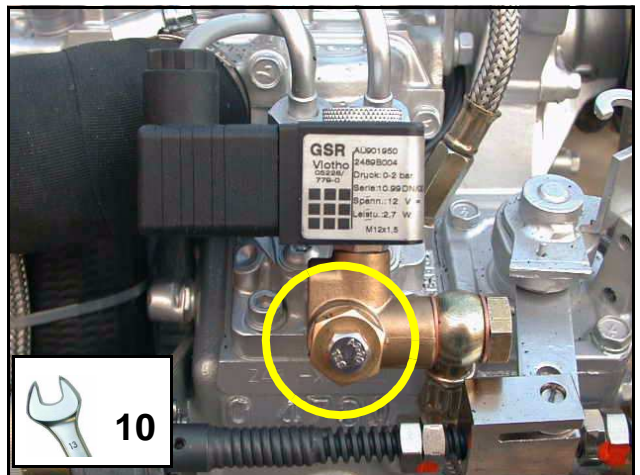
Ventilation Screw at the fuel solenoid valve
